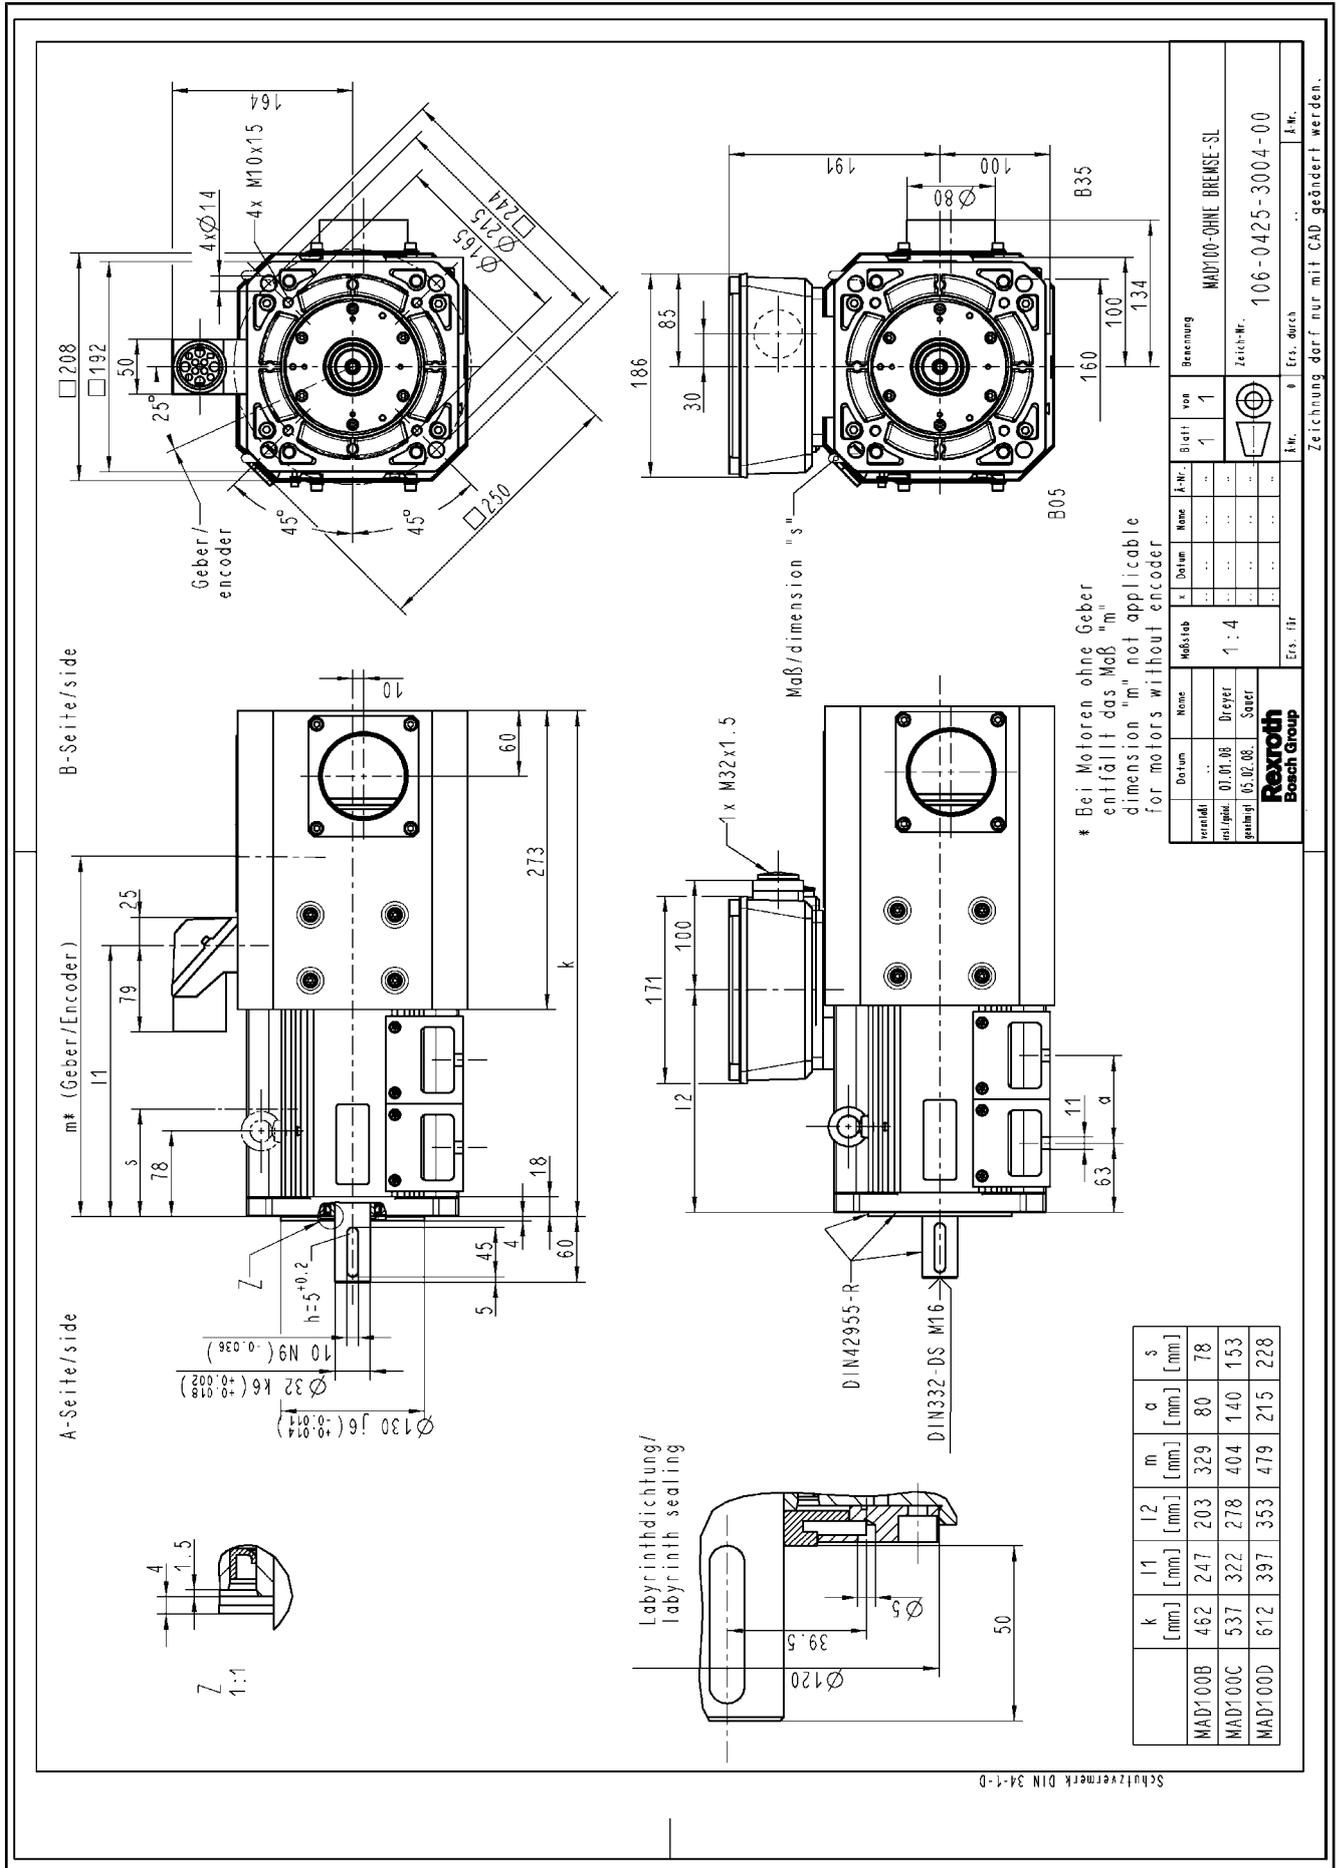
MAD100 with fan adapter, without brake (terminal box rotatable)
